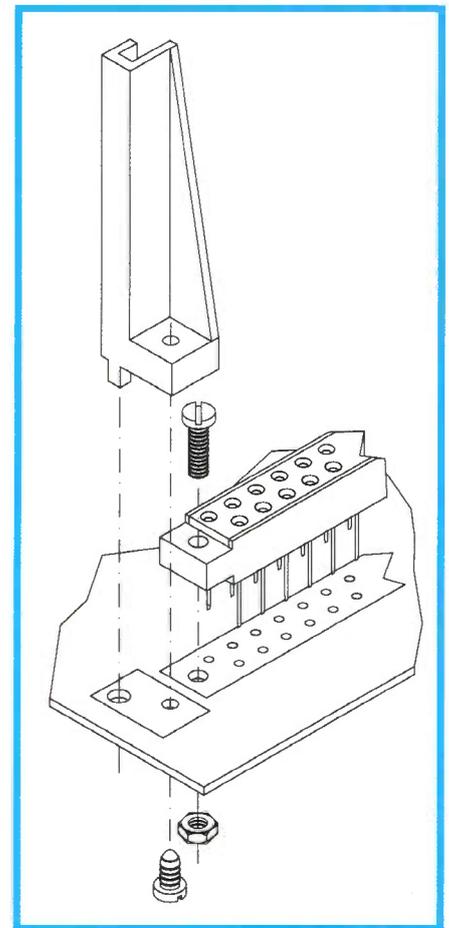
Mounting the motherboard PCB socket and card PCB guides.
